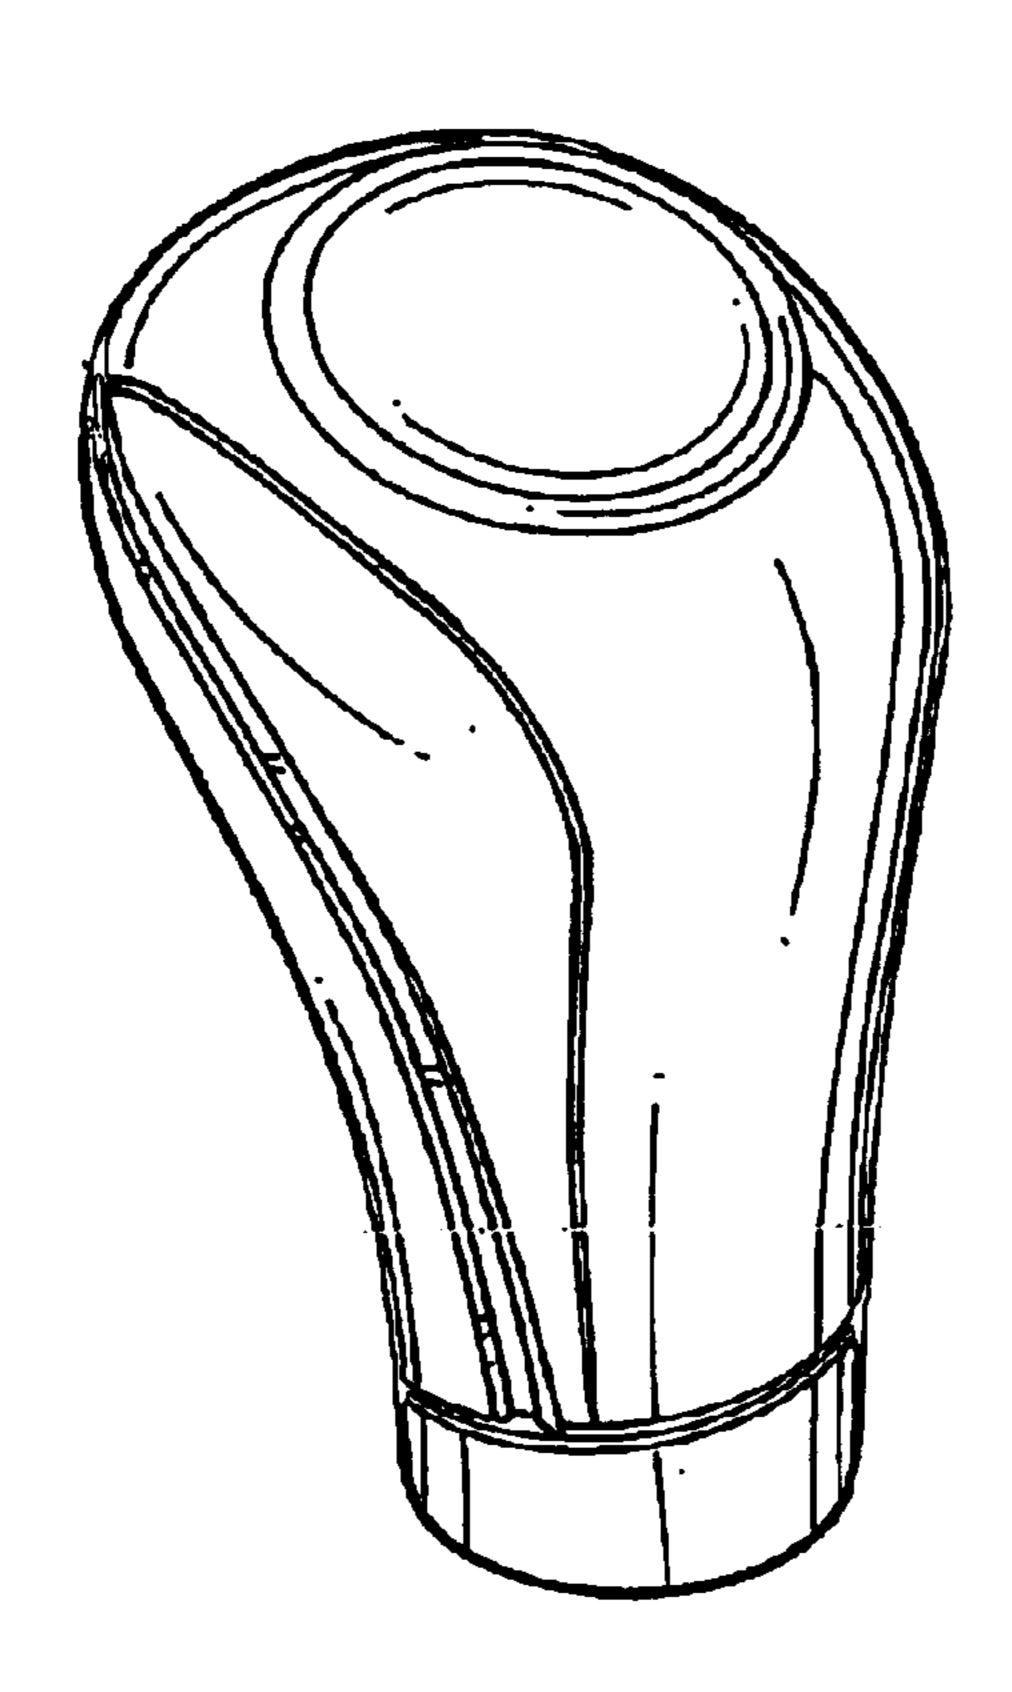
is a front, left perspective view of a surface configuration of a gearshift knob for a vehicle according to our novel design, the right, front perspective view being mirror symmetrical;
